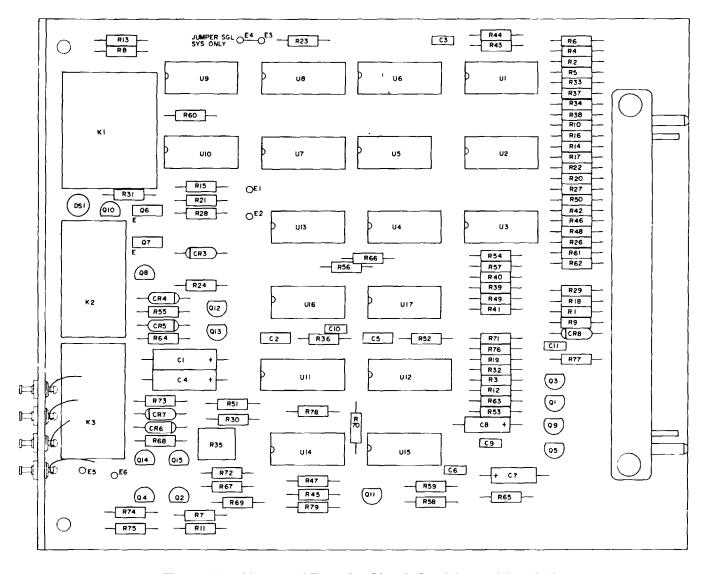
Alarm and Transfer Circuit Card Assembly, 1A2A2
